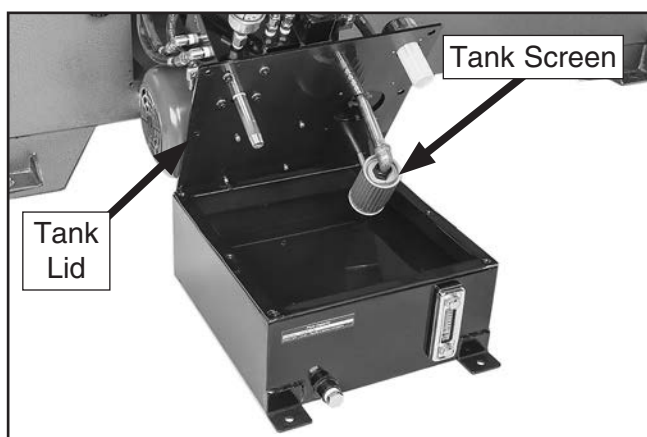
Hydraulic fluid tank lid removed to access for cleaning.
